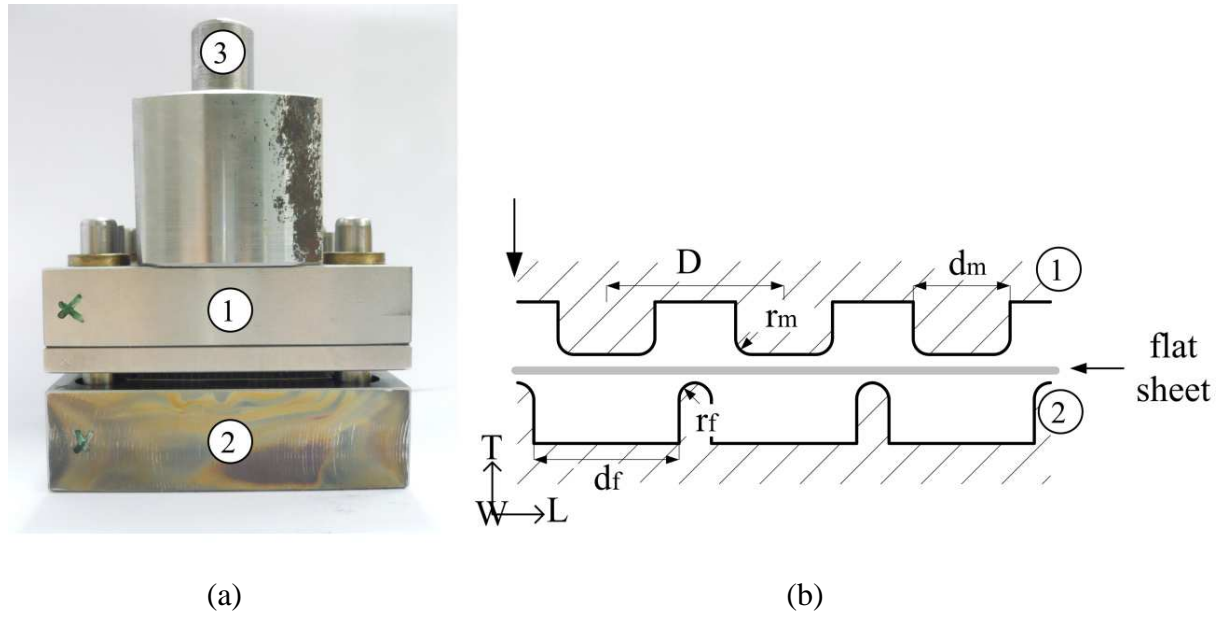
(a) Photograph of the stamping tool comprising a male die (part 1) and a female die (part 2); (b) side view of before stamping,
